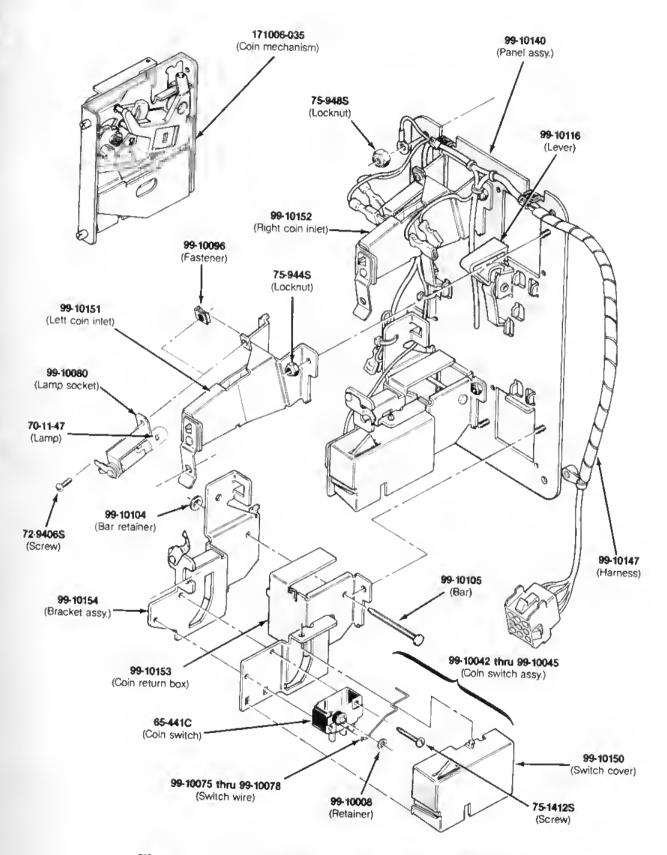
American-Made Coin Door Assembly 171027-001 A
